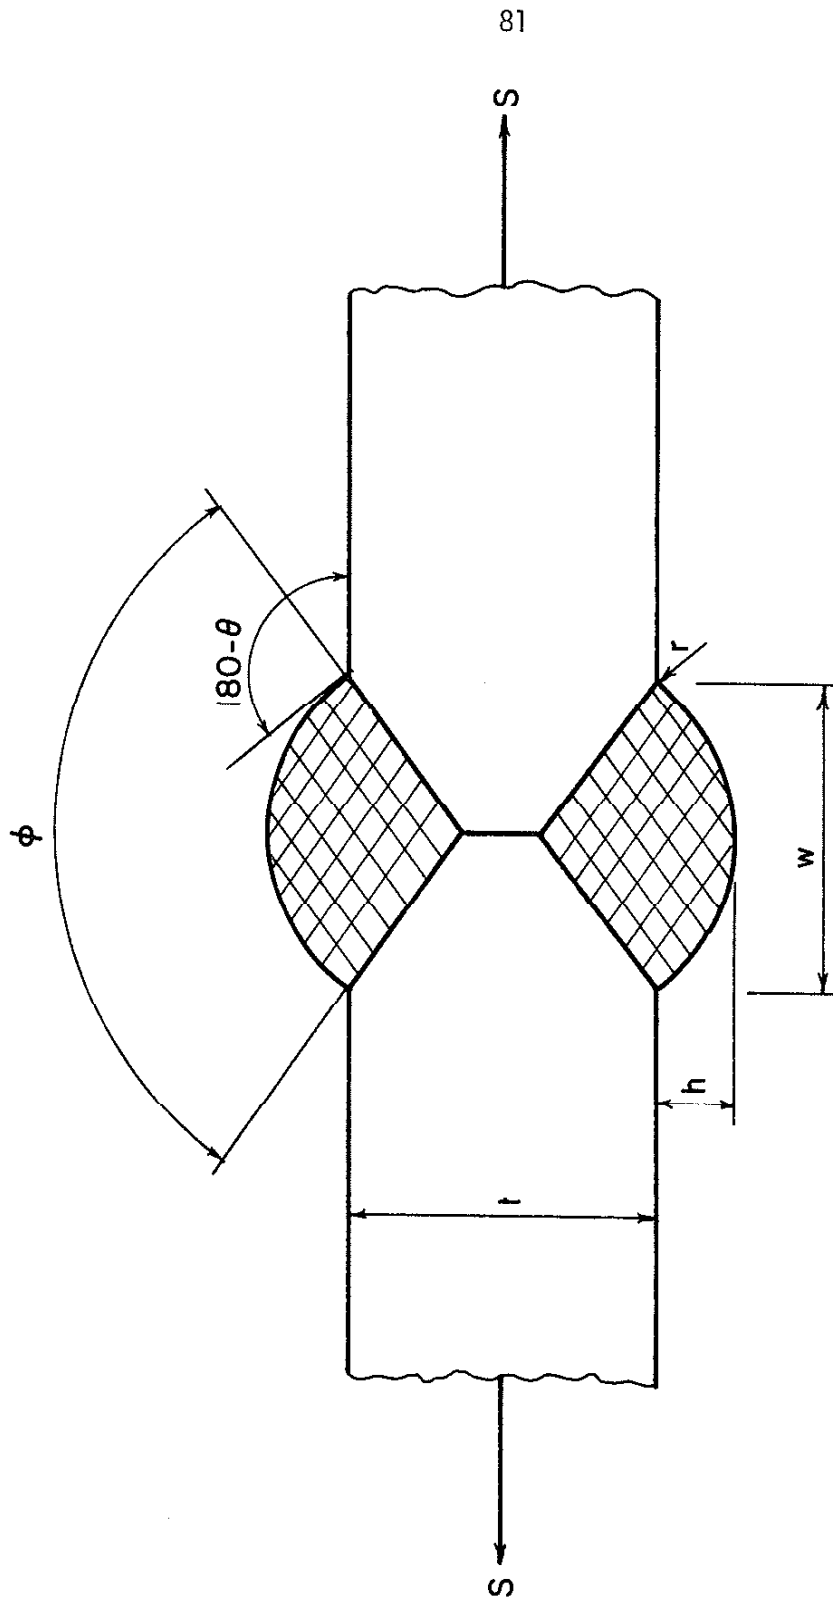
Circle Segment Approximation of a Double-Vee Butt Weldment Geometry (14)
